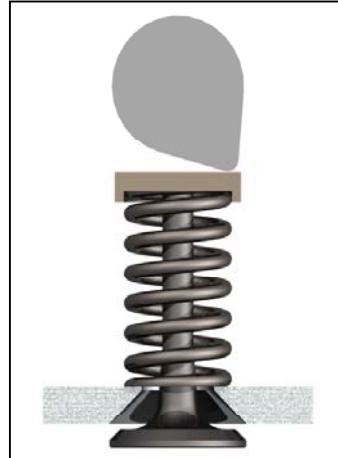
Camshaft lobe profile and rotation combine with valve spring force to create resistive torque on the camshaft.
